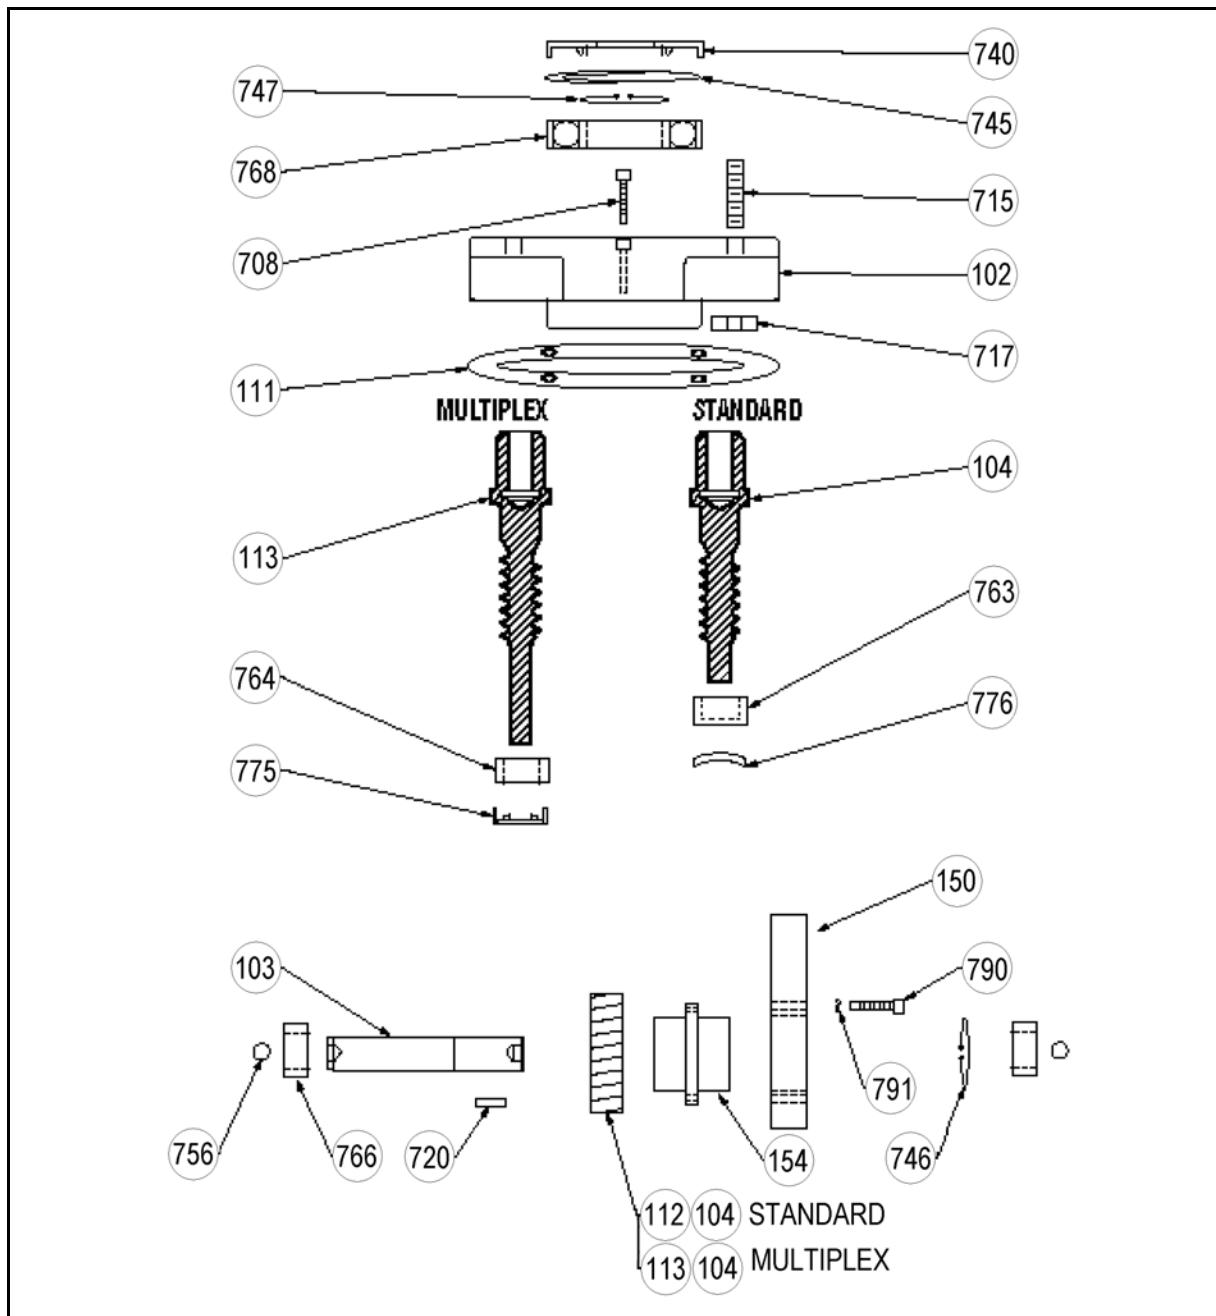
Drivecase Assembly/Pulseless Cam Assembly.
